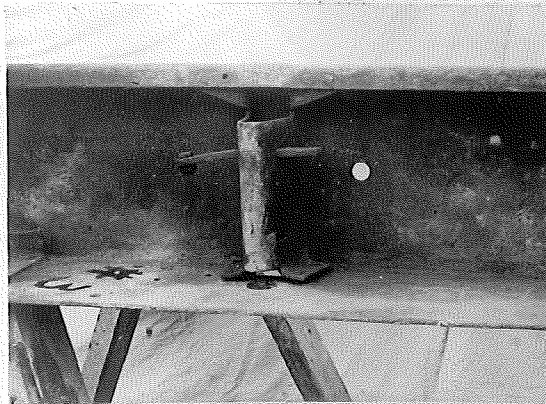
Another type of stake pocket on an old C form; note sheared rivets at the lower end of pocket.
